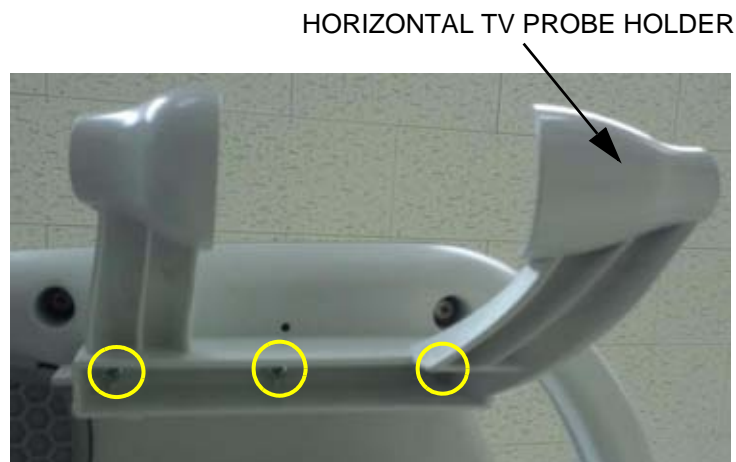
Assemble HORIZONTAL TV PROBE HOLDER with 3 screws (2306565, BH M4x16)
